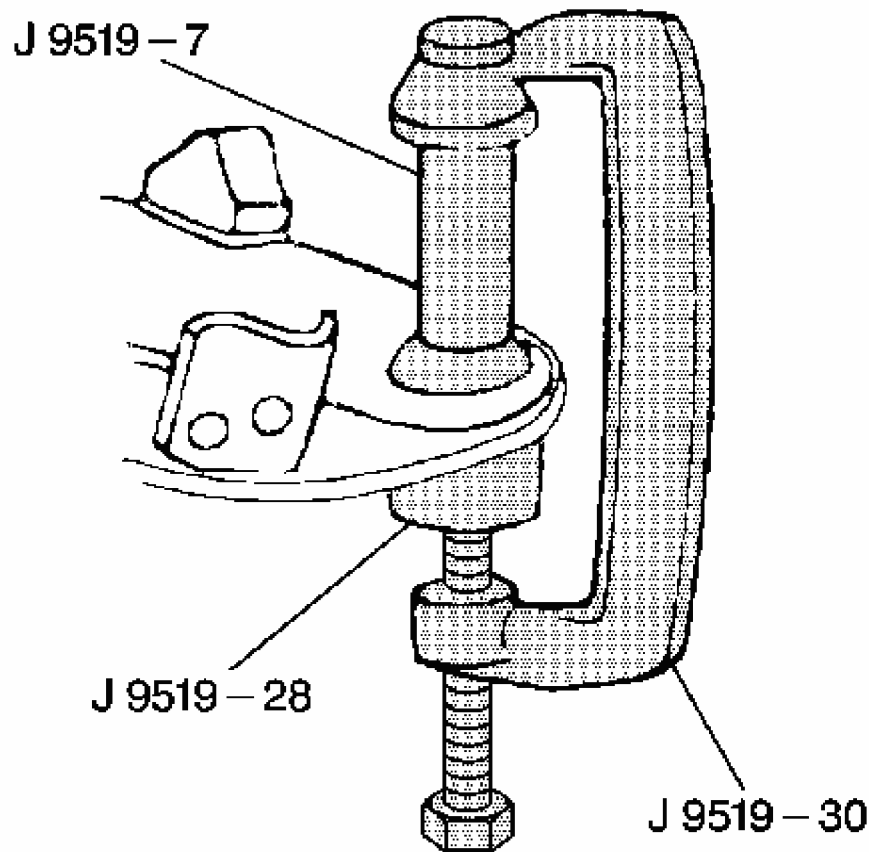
Remove The Lower Ball Joint From The Lower Control Arm
